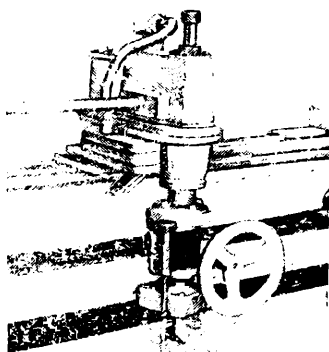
Mechanical head to Type АСП-1 rectangular-co-ordinate cutting machine
